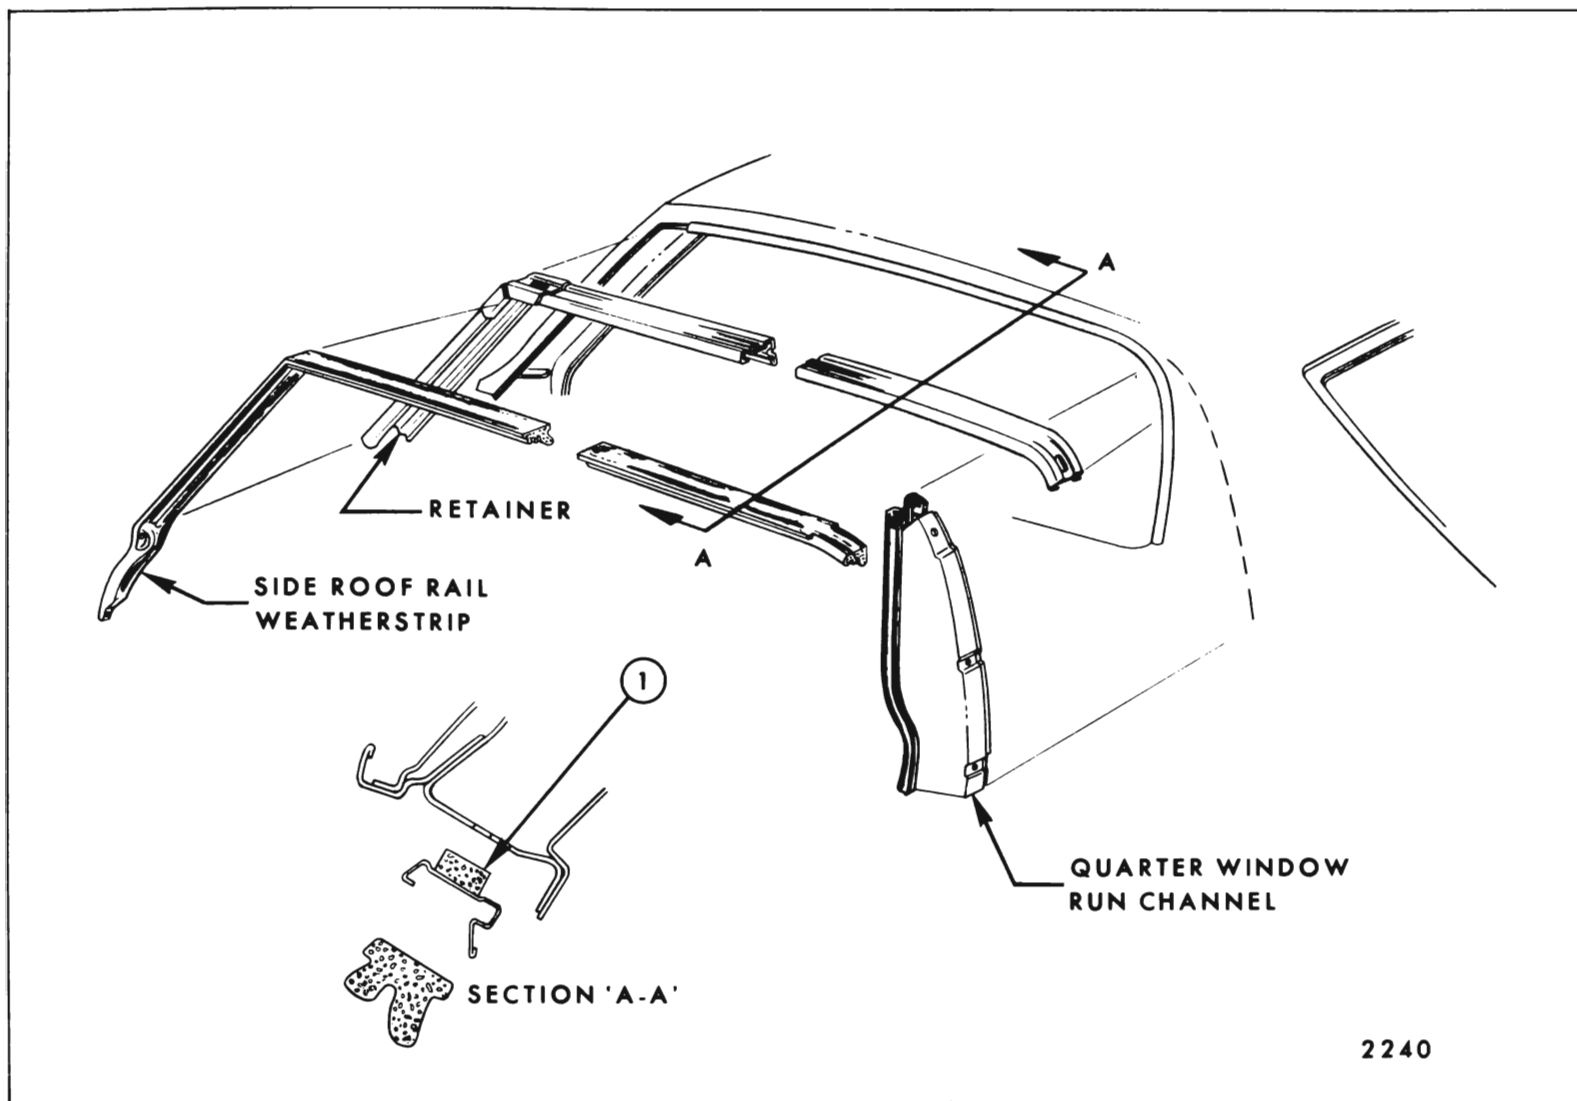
Side Roof Rail Weatherstrip and Retainer - "B-47" Styles
